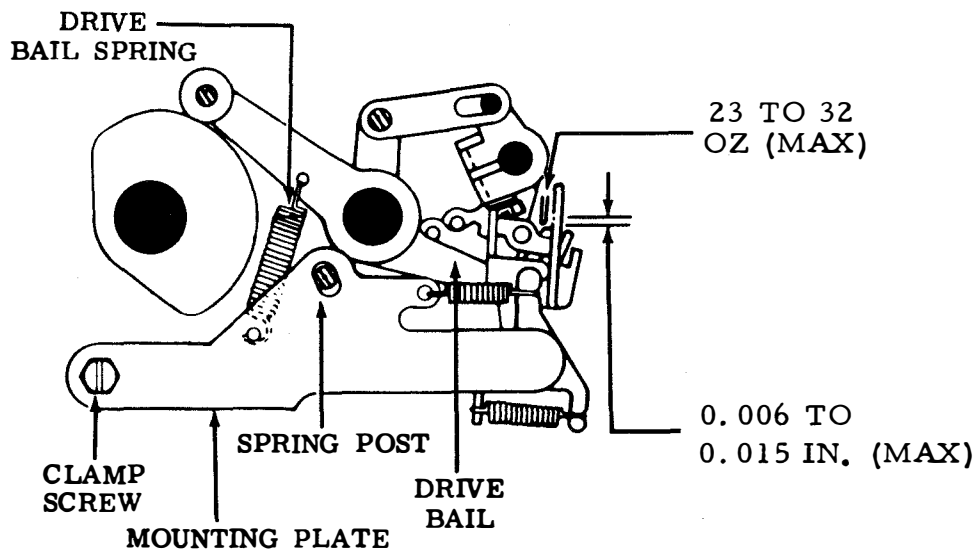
Drive Bail Spring and Mounting Plate, Reperforator, Front View
